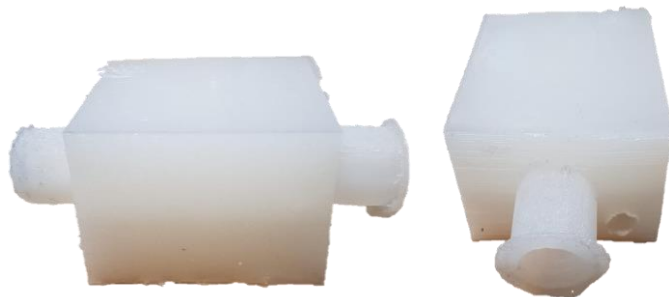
Heart silicon rubber pad (a) side view, (b) front view.
